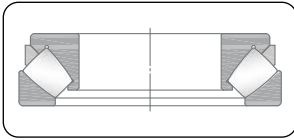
Oil pumping effect of single direction spherical roller thrust bearings
